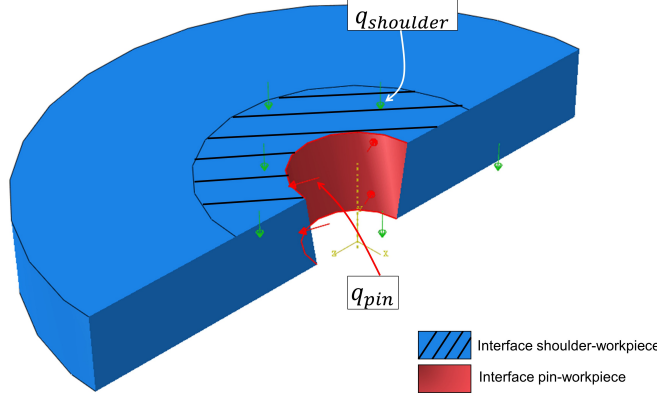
180° view of the workpiece and the surface heat flux applied on the contact surfaces.
